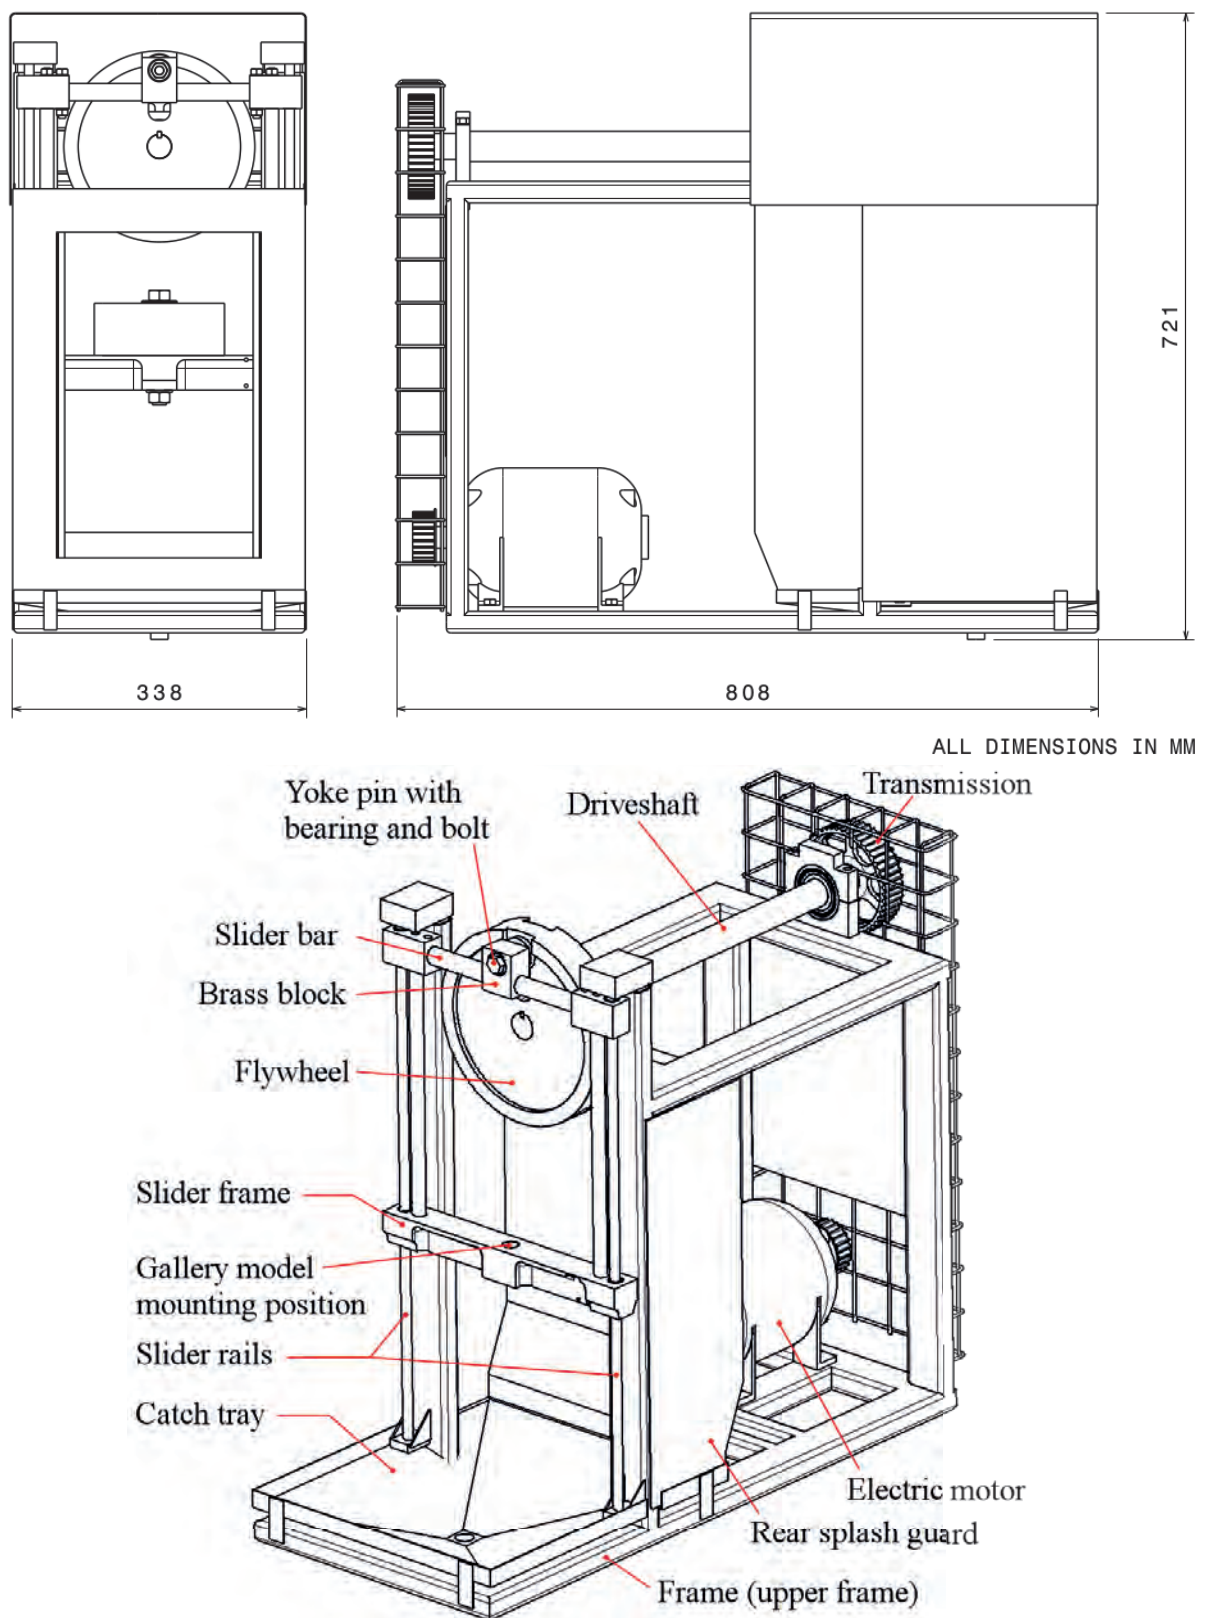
Side and front view of upper frame with overall dimensions and isometric view without front splash guard cover
